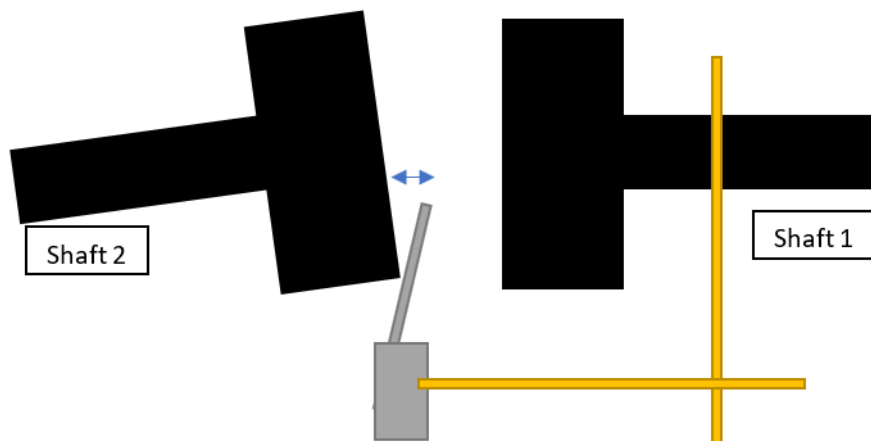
MEASURING TECHNIQUE FOR ANGULAR MISALIGNMENT IN FINISH POSITION
